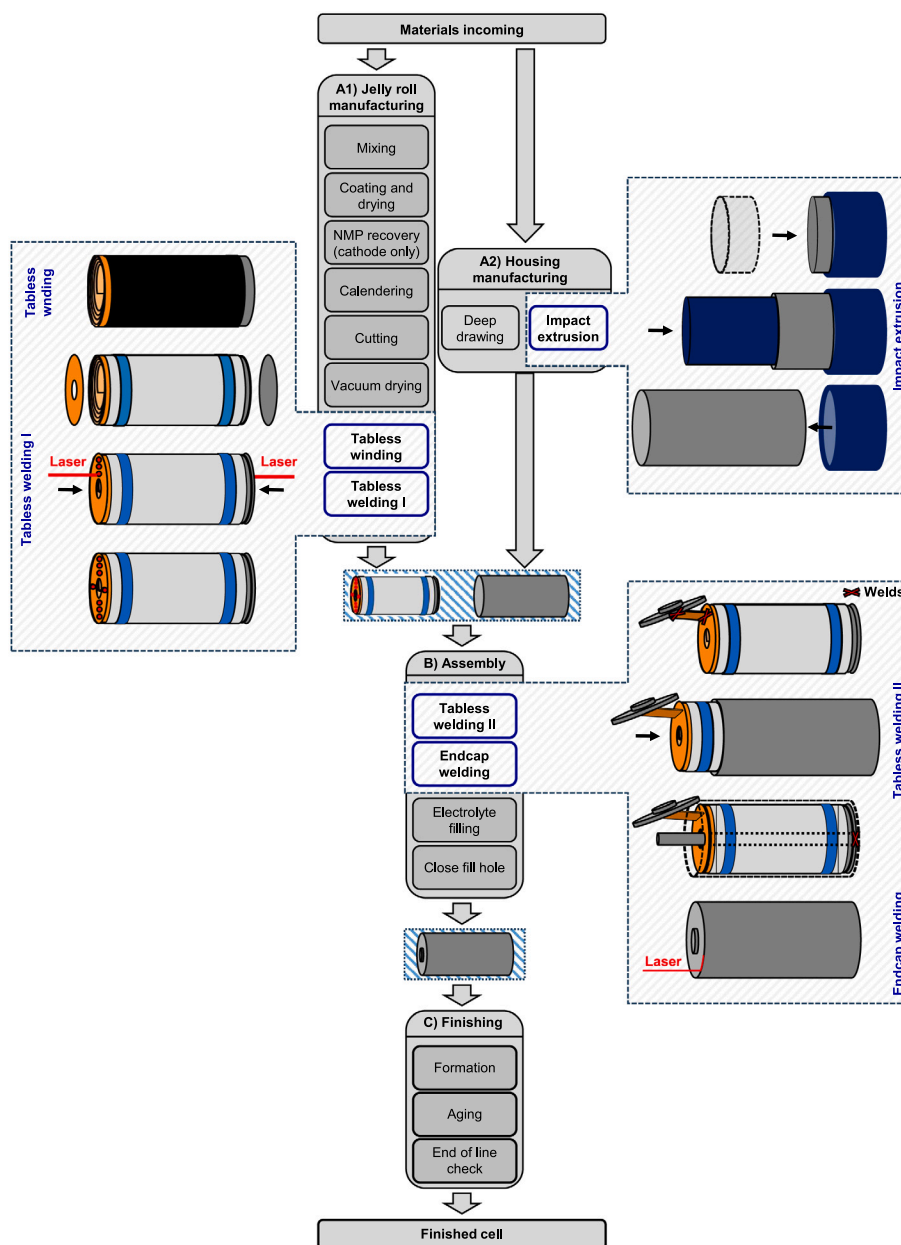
Manufacturing process of large-format tabless cylindrical lithium-ion cells including can and endcap. Top left: manufacturing of tabless jelly roll with collector plates (A1), top right: deep drawing (steel) or impact extrusion (aluminum) of the can (A2), middle: cell assembly (B) and bottom: finishing (C). Note that this is just one of the many ways to manufacture a tabless cylindrical cell.
